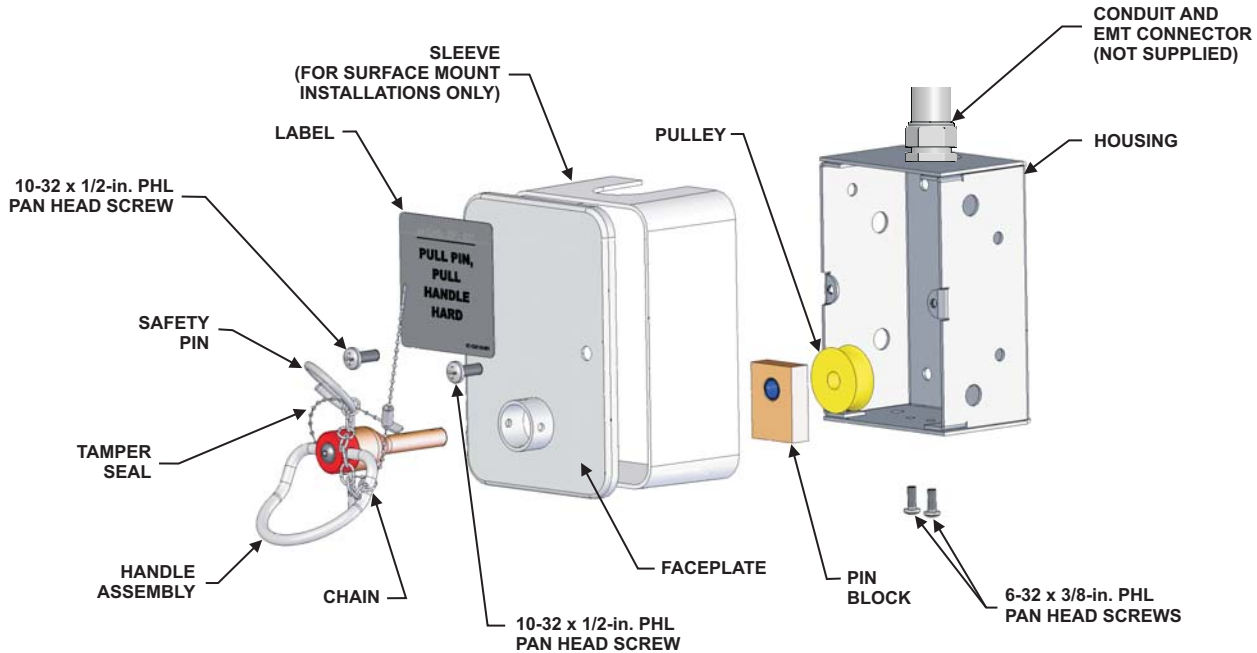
Exploded View of the Remote Manual Release Pull Station, Release-to-Trip
